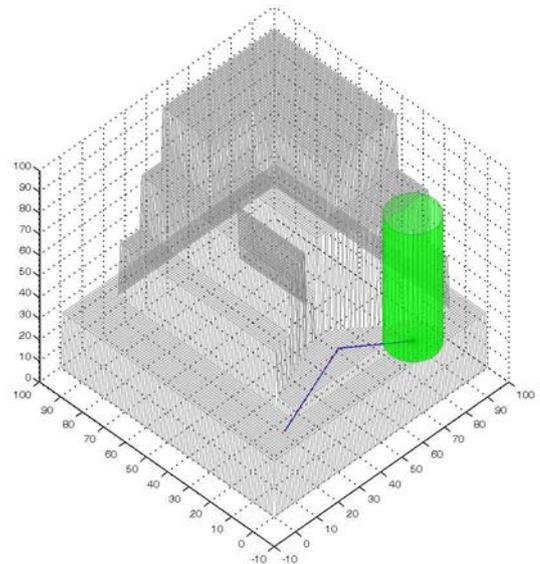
Tool position and transformed workpiece shape at the end of the second tool path segment
